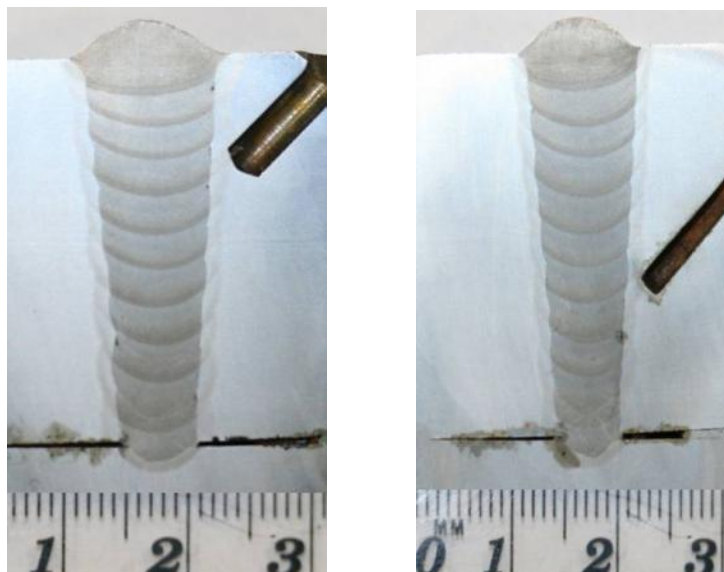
Macrographs of tandem MIG X70 weld 2
